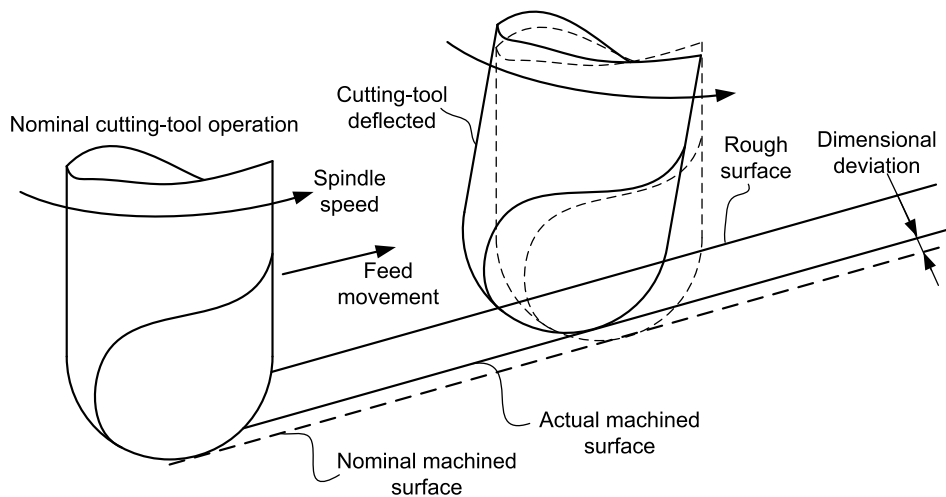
Example of cutting force-induced error in a ball end milling operation.
